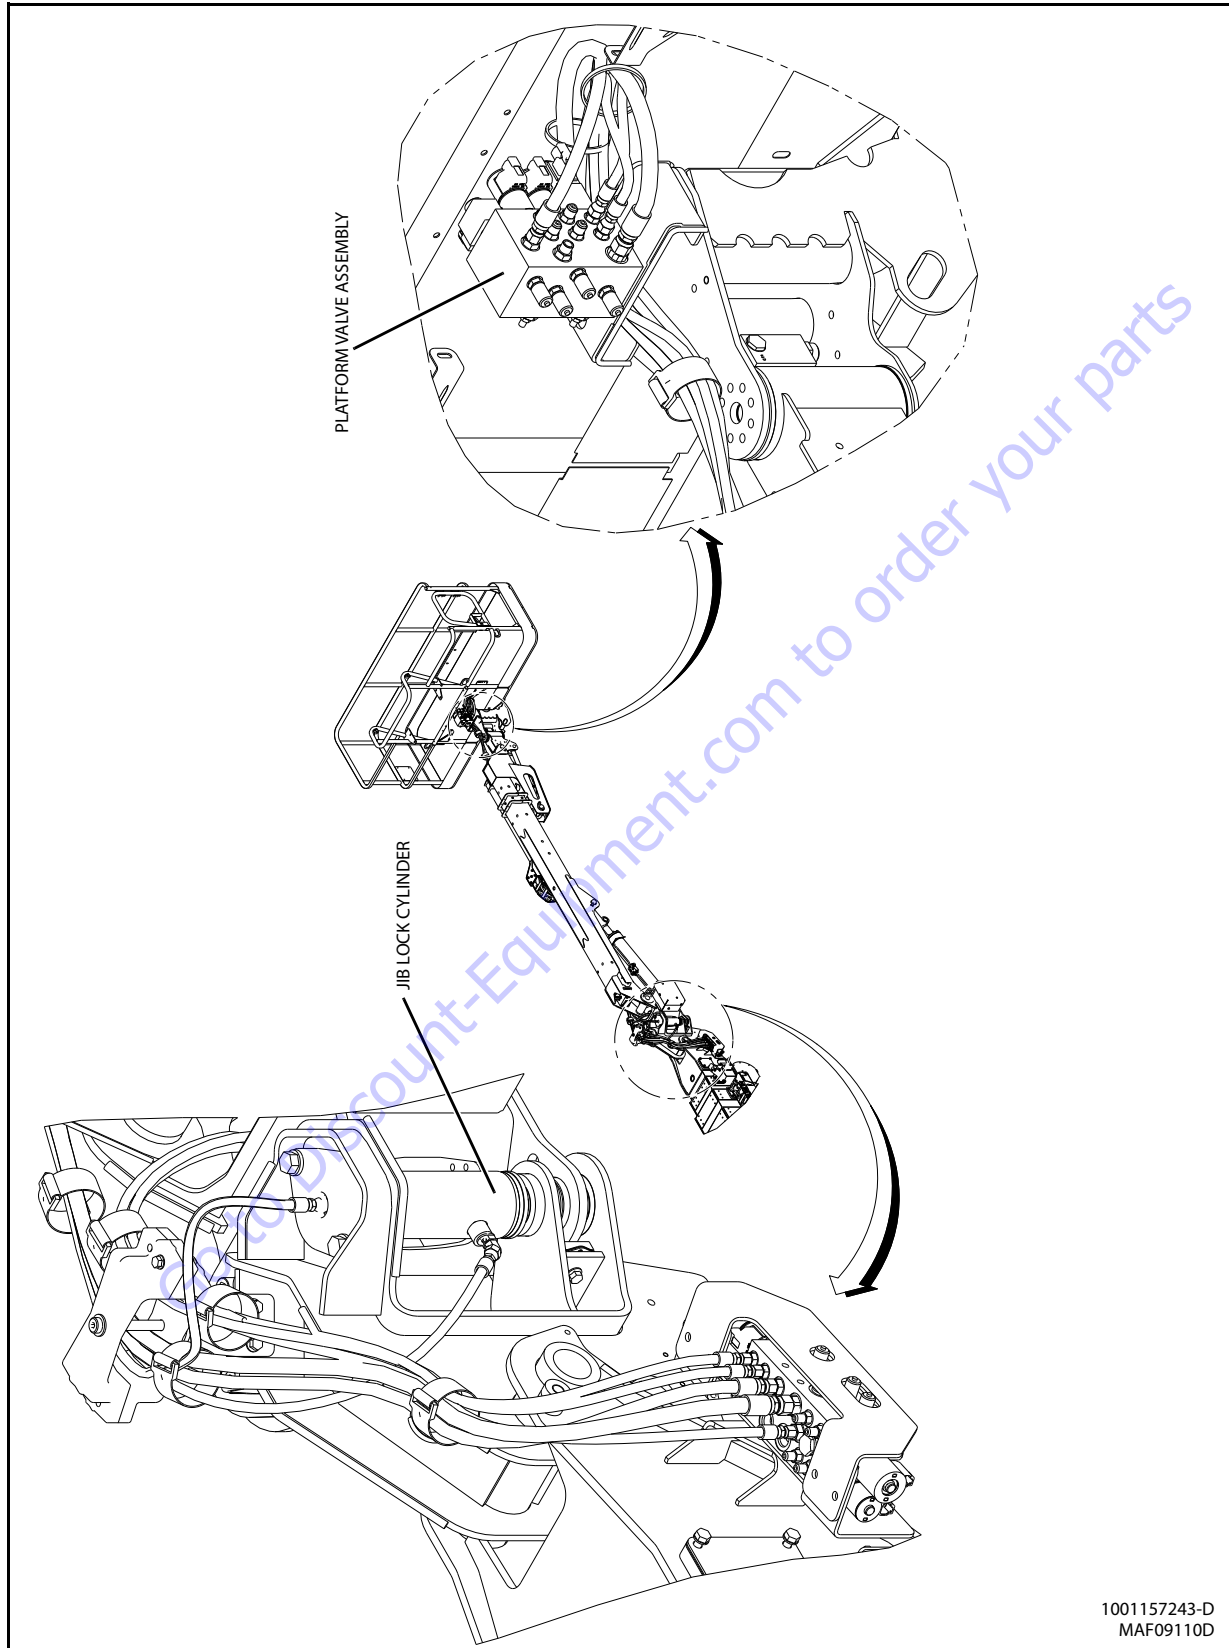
Jib Hydraulics - Sheet 4 of 7
